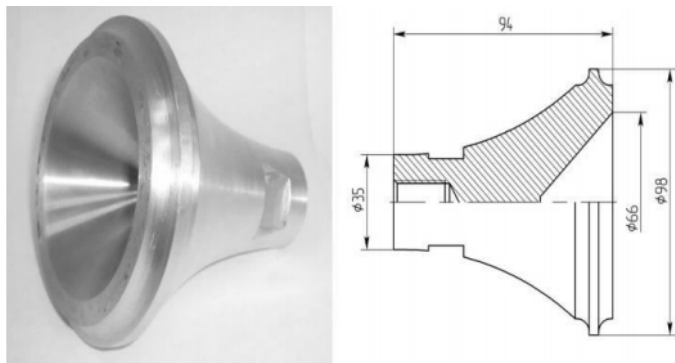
Welding tool for the formation of lengthy continuous welding seams.
